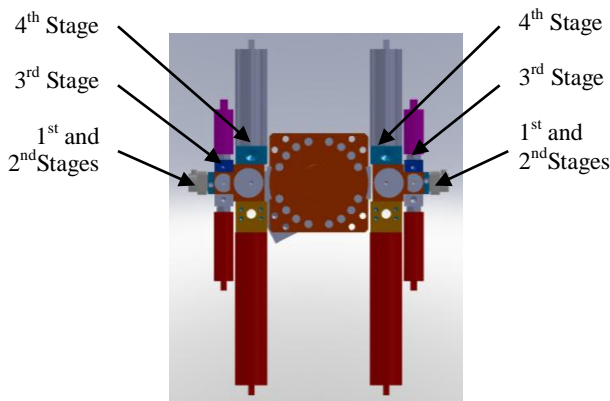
LF60 4 stage inplane Valves arrangement: front view
